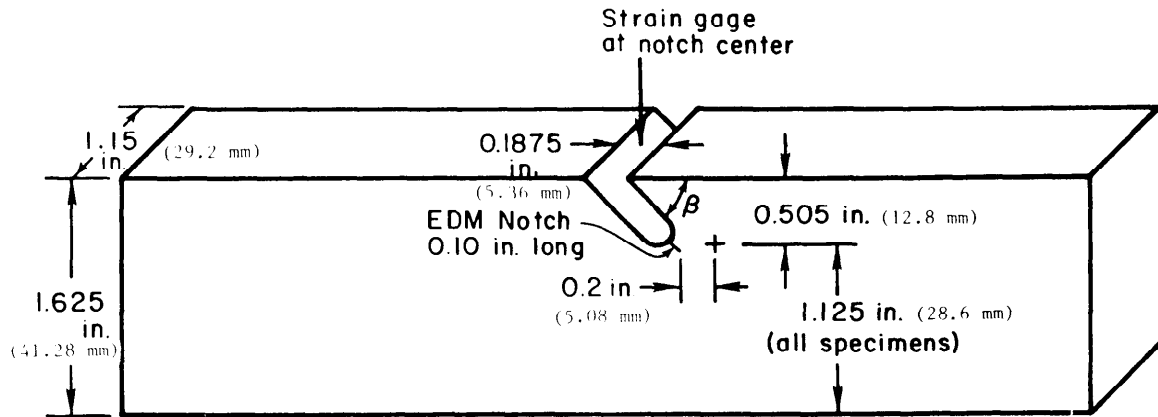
IMPACT SPECIMENS WITH CRACK STARTER
